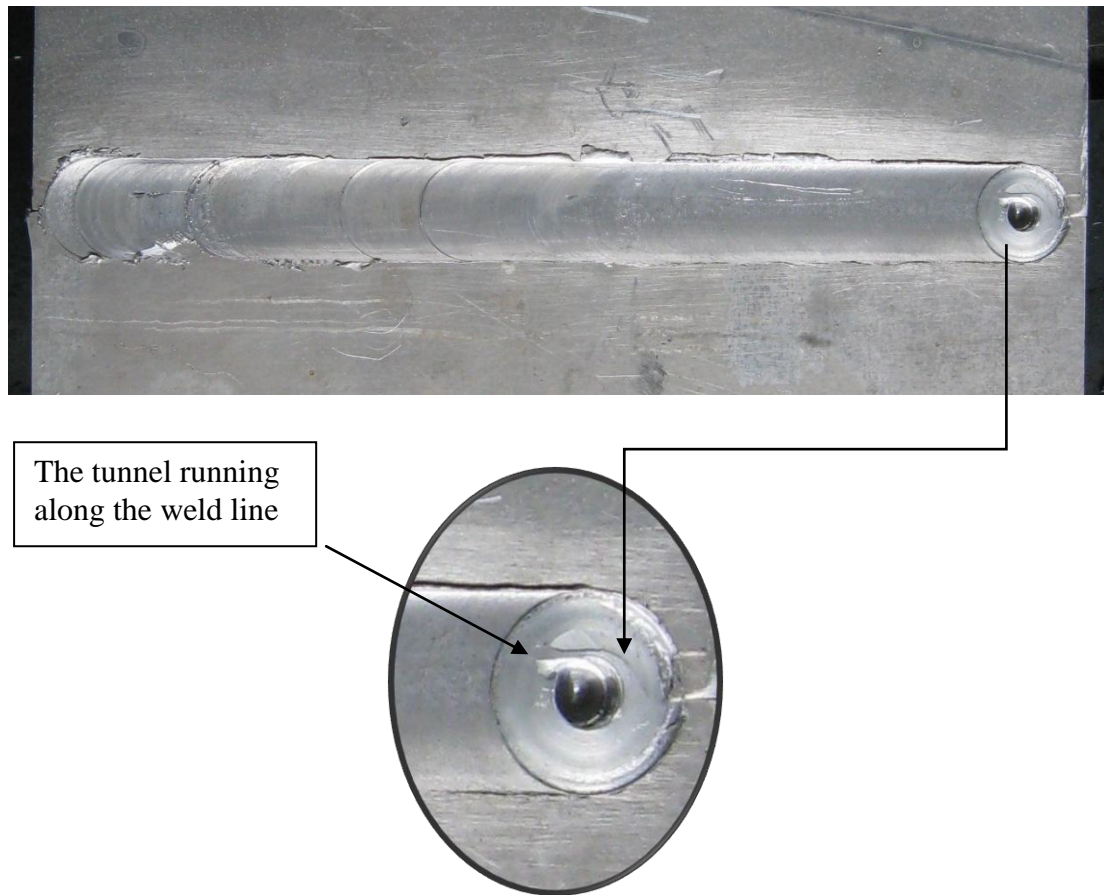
The appearance of the welds using 0° tilt angle
